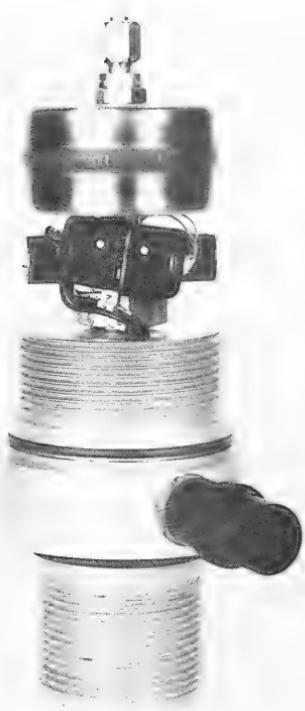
Ordnance safe-and-arm device with refillable gas canister assembly.
